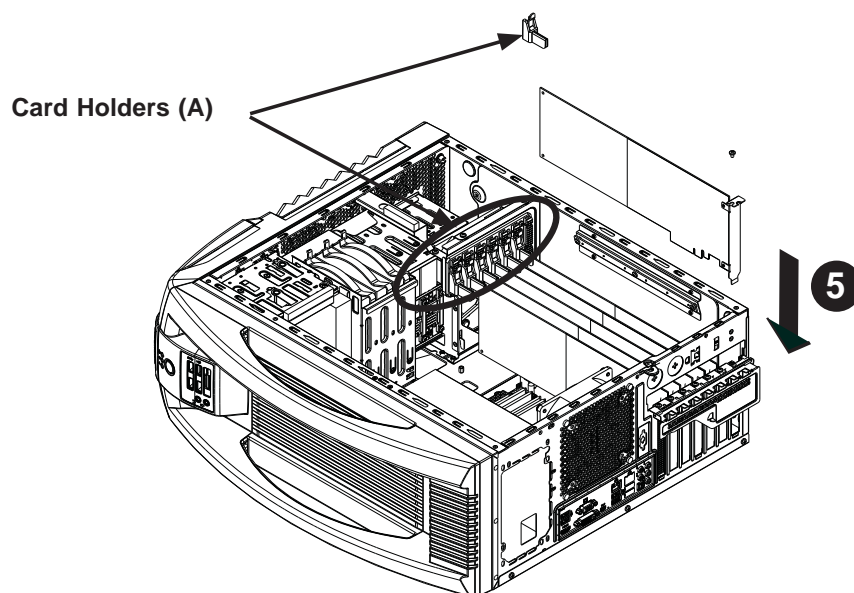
Installing a Full-Height, Full-Length Expansion Card
